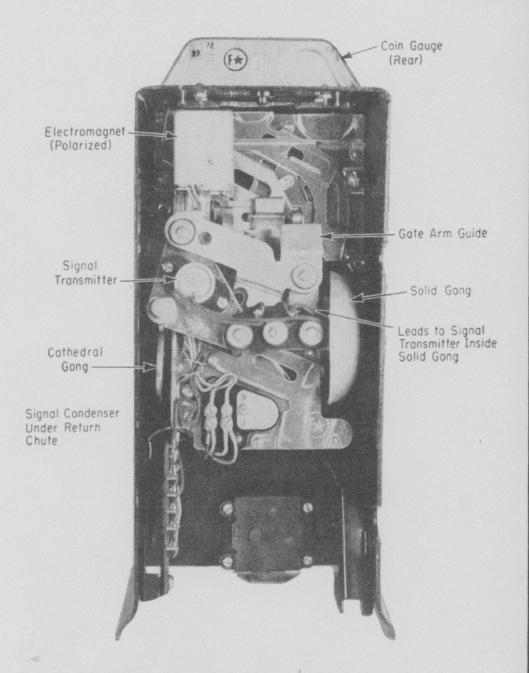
Chute Mounted Gong Signal Assembly (Mounted in an Upper Housing)
